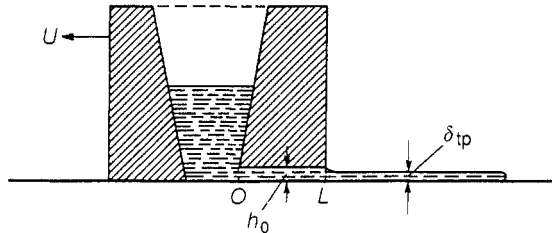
Section of a tape casting unit. (After Ref. 2.)
